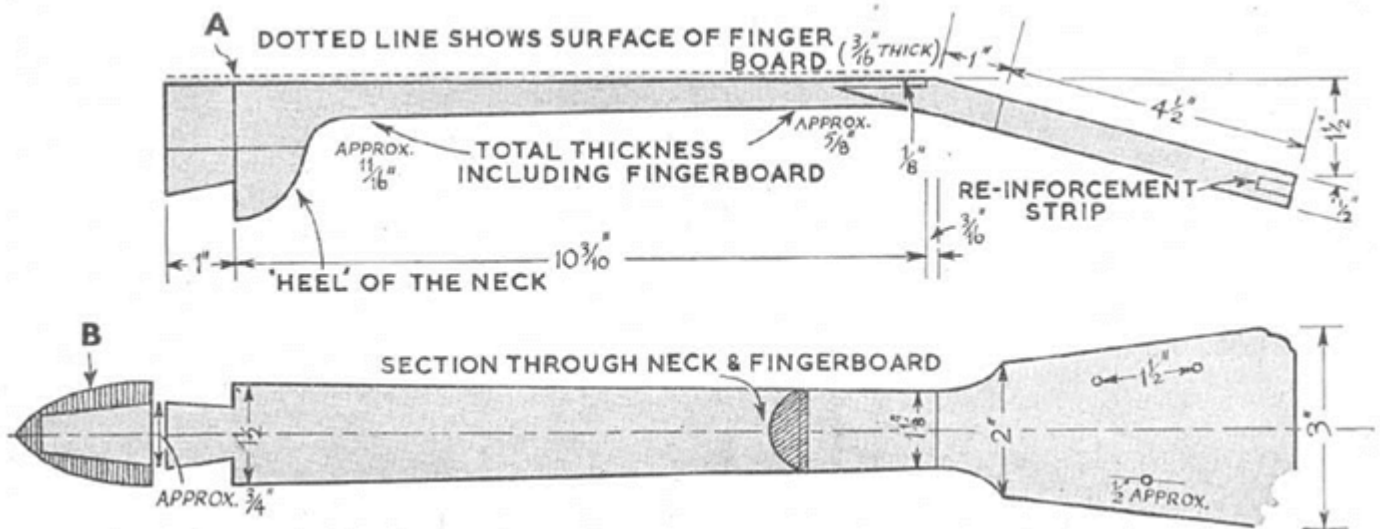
SIDE ELEVATION AND PLAN OF NECK AND FINGERBOARD. Note reinforcement strip.
